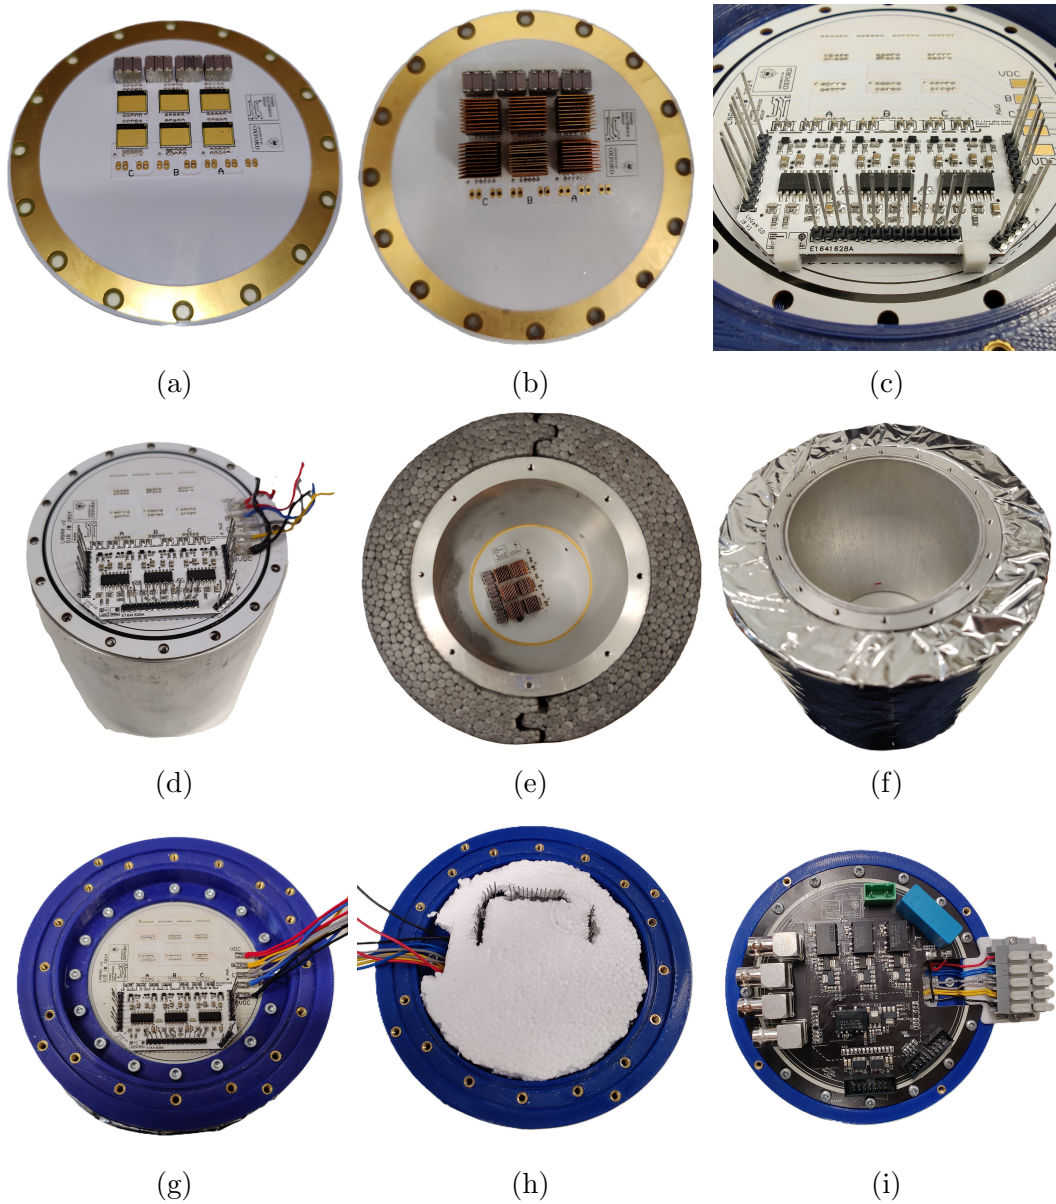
Assembly process of the cryogenic inverter. (a) GaN HEMTs are soldered to the power board, (b) finned heat spreaders are soldered to the thermal pad of the transistors with In/Sn solder, (c) gate driver board is attached to the power board with soldered header pins. 3D printed support clips are used to set the air gap. (d) shows how the power board is positioned relative to the LN2 vessel (e) polystyrene insulation is clamped around aluminium LN2 vessel, (f) mylar foil is wrapped around insulation and a ring of indium solder wire is placed into the o-ring groove (g) the power board is clamped to the LN2 vessel with the PETG support ring compressing the indium o-ring, (h) a polystyrene insert is positioned above the power board, slots are cut for the inter-board header pins and power cables, (i) the supply board is mounted to the PETG support ring, the header pins are soldered and the power wires connected to a terminal block.
